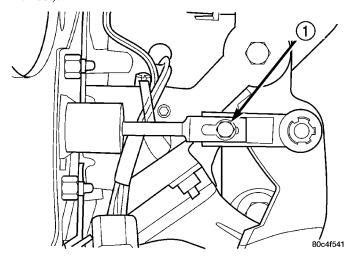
Clutch Master Cylinder Pushrod Adjustment Screw
